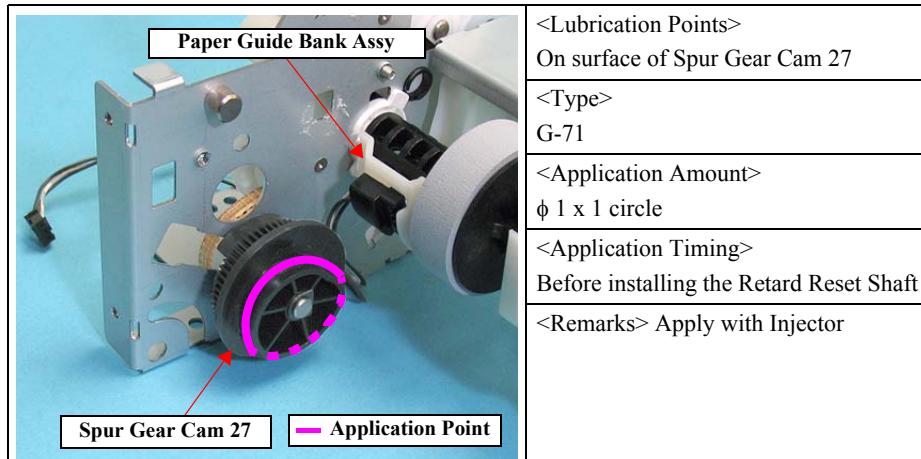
Lubrication of the Paper Guide Bank Assy (3)
